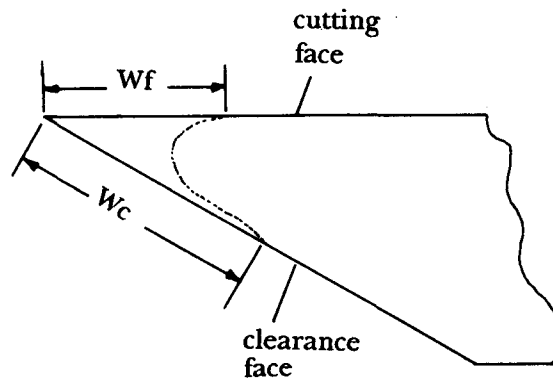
Measurement of clearance face wear, W_c and cutting face wear, W_f of a planer knife edge
